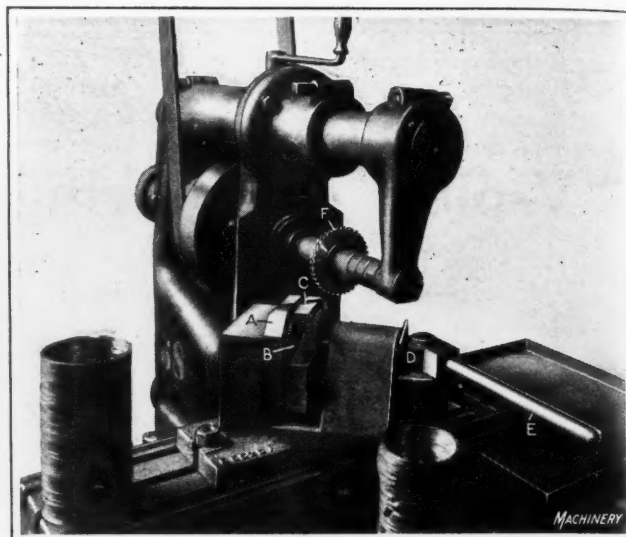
Hand Milling Machine equipped with a Special Vise for holding the Outside Piston-rings while cutting a Diagonal Slot
